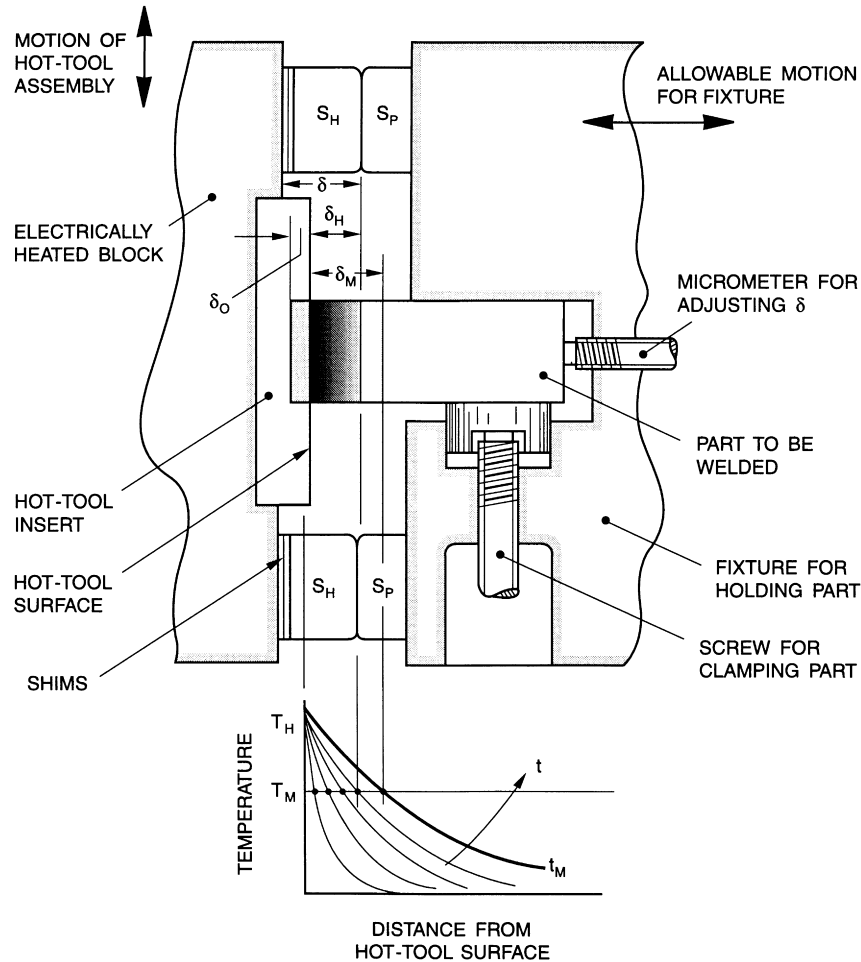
Schematic diagram showing geometric parameters for displacement-controlled hot-tool welding using mechanical stops.
